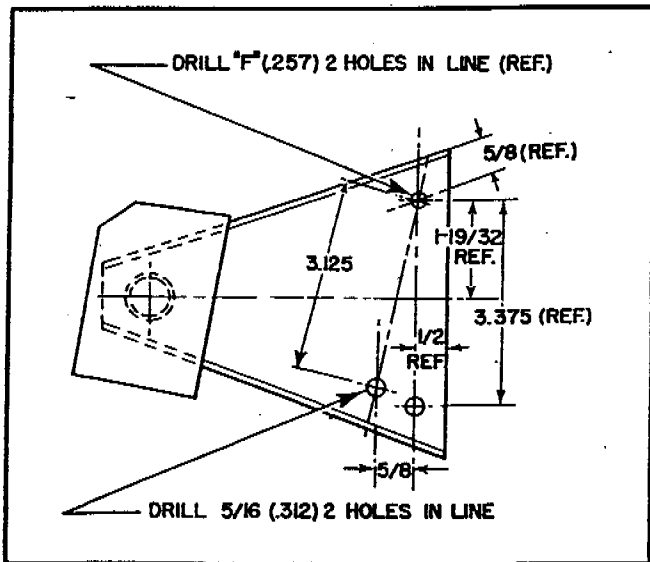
A - View Showing Location of Additional Hole to Be Drilled in the Elevator Inertia Weight Assembly for Use on P-51B, P-51C, and F-6C Airplanes
